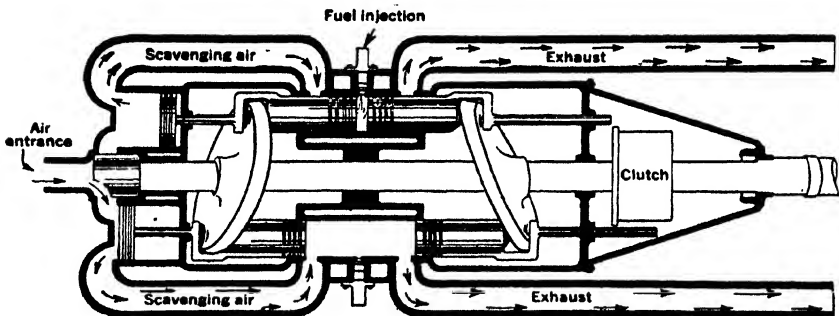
Principles of operation, Sterling crankless opposed-piston Diesel engine.
